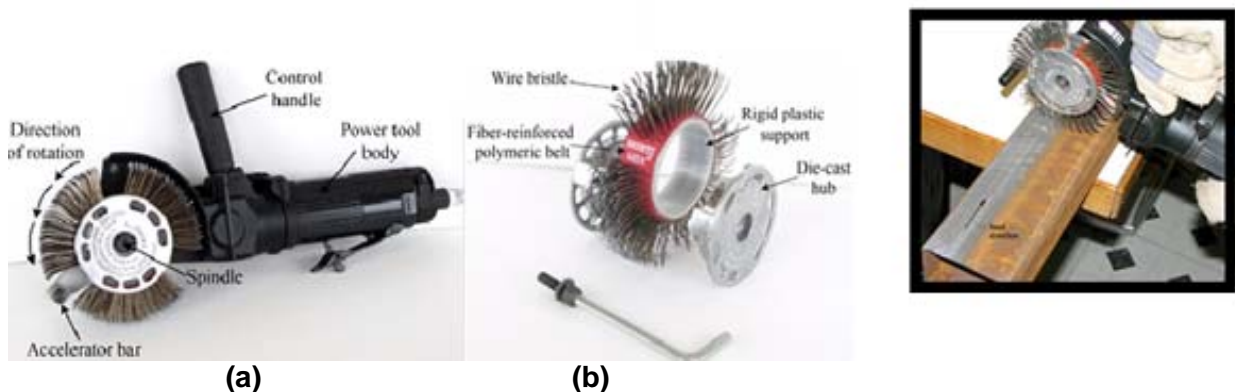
(a, b) Components of hand operated bristle blasting power tool, and (inset) illustrating tool use during a typical cleaning application.
